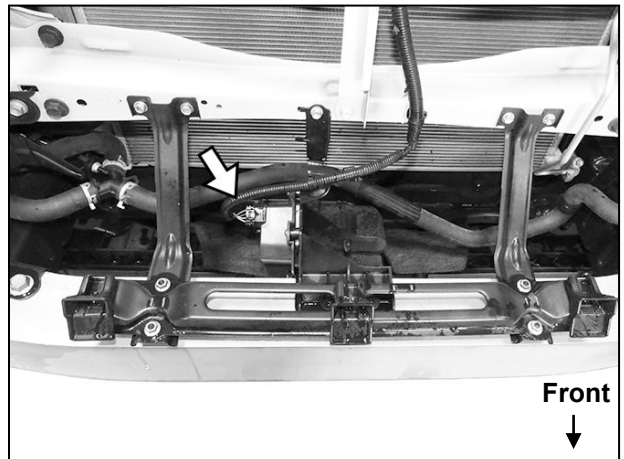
Unplug all wiring harnesses leading to front bumper (passenger/right side pictured)
